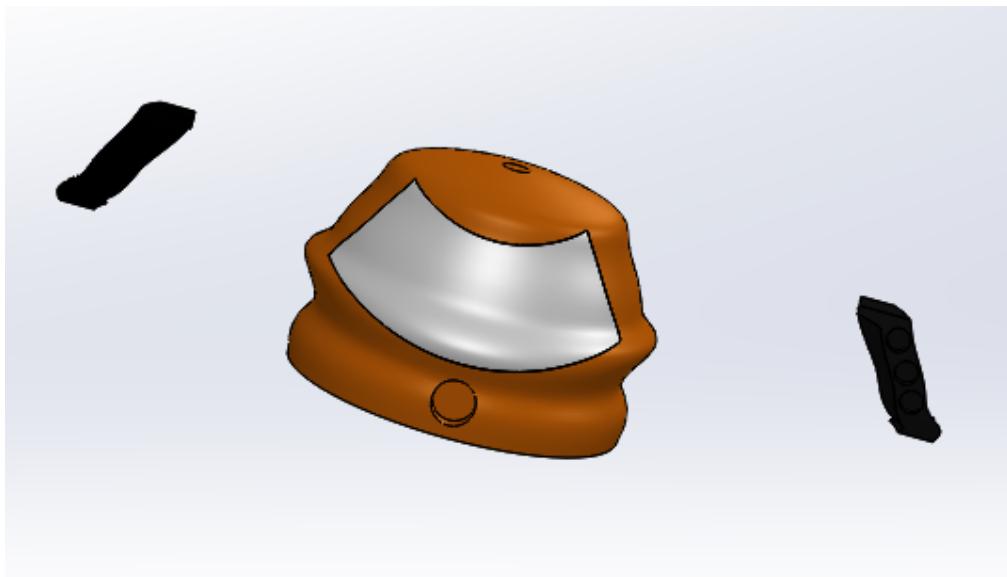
Ferrarer, Auston: Assembly Step 2
